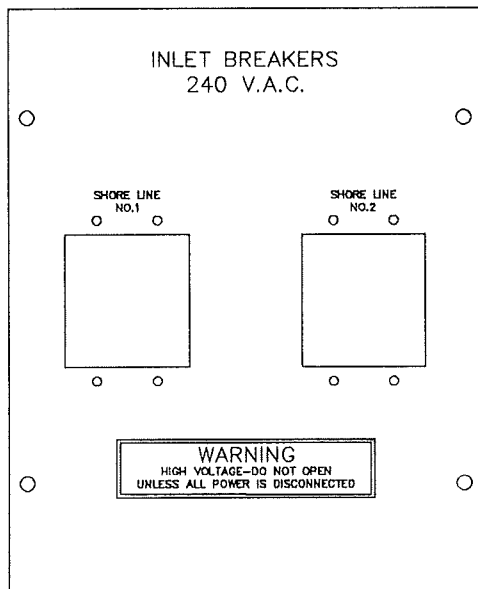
A-4: 240Vac Shore Power Inlet Breaker Panel
